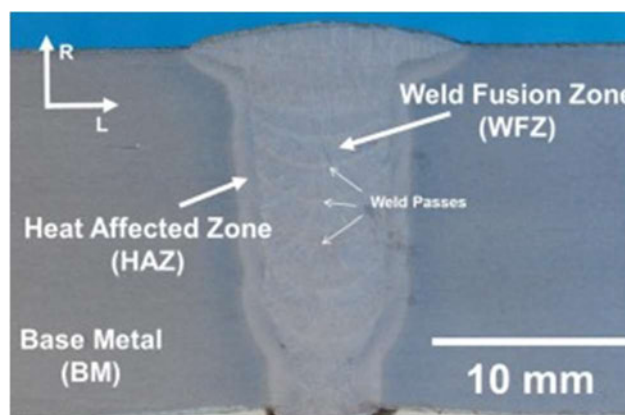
Macroetched image of a butt weld [35].
